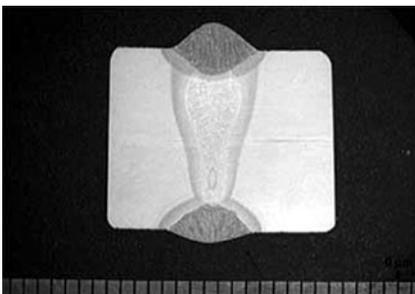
macro section showing MAG root and cap beads & central hybrid weld bead
